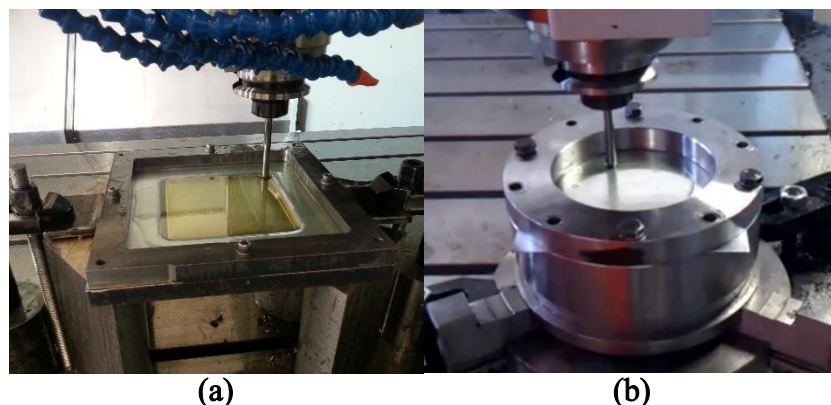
The ISF operation performed in MFCE with 10 mm diameter tool.
